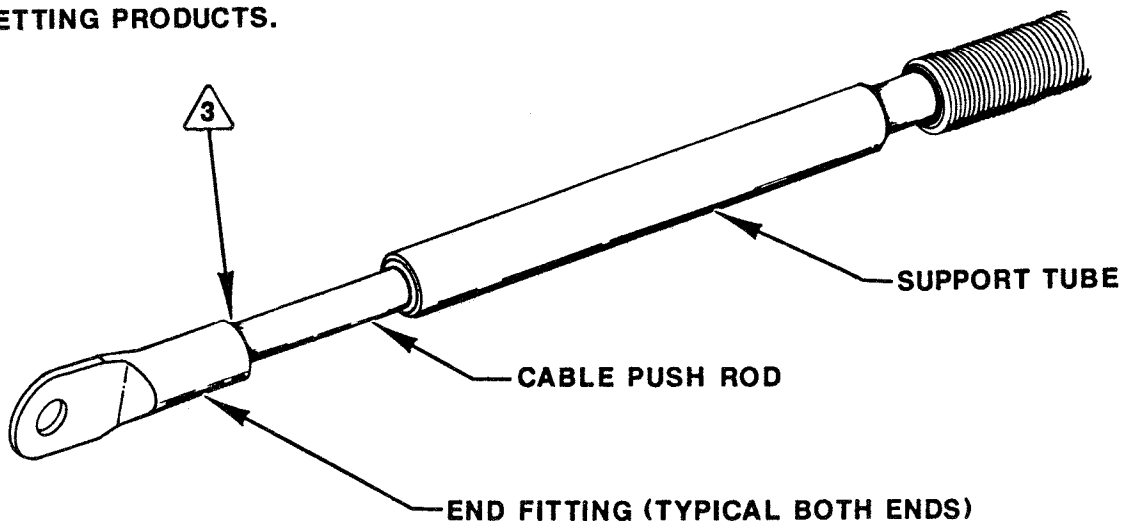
INSPECTION OF THROTTLE CABLE ASSEMBLY
